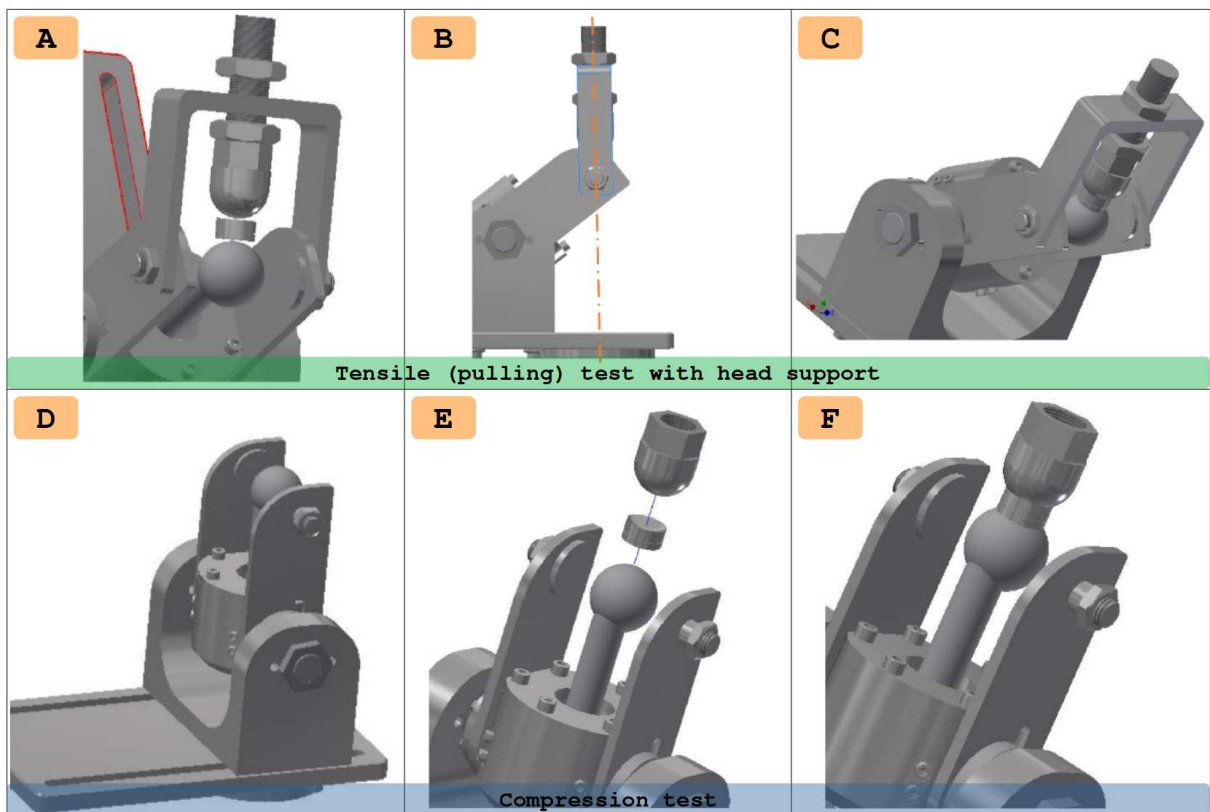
Tensile and compression test fixture positioning. A: For a *tensile test with head support*, place the bi-concave adapter between the ball-joint and the bone, the circular groove closer to the bone. If there is a resin molded adapter, place it between the bi-concave adapter and the bone. B: Center the head support rod to the testing machine axis. C: Tighten the rod and the ball-joint in order to apply a small compression to the humeral head. D: For a *compression test*, rotate the base to the desired angle and place it so the humeral head is aligned with the machine axis. E: Adapt the ball-joint to the upper cross-head and place the bi-concave adapter (and the resin molded adapter if any) above the humeral head, the circular groove closer to the bone. F: Move the testing machine actuator so the ball-joint is positioned on the bi-concave adapter.
